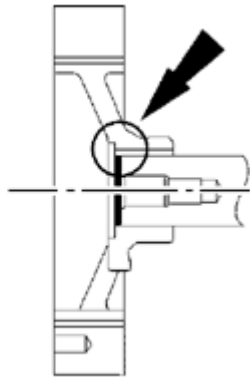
Installing Crankshaft Front Seal Using Front Cover Oil Seal Installer And Crankshaft Vibration Damper Installer
